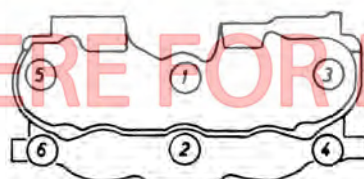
Cylinder Head Bolt Tightening Sequence
